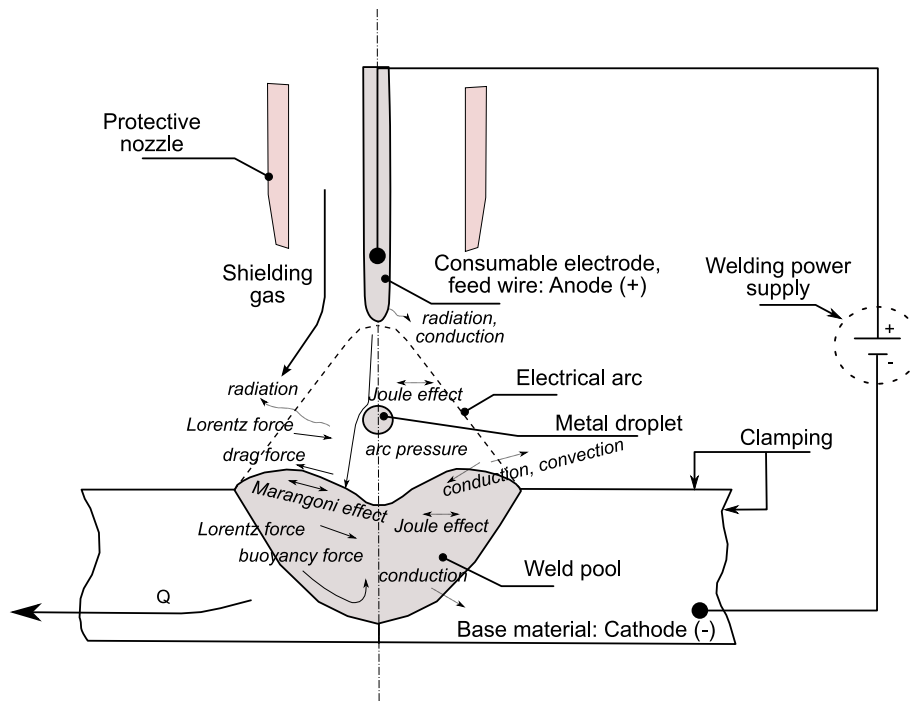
Physics description of Gas Metal Arc Welding (GMAW) during a static operation.
